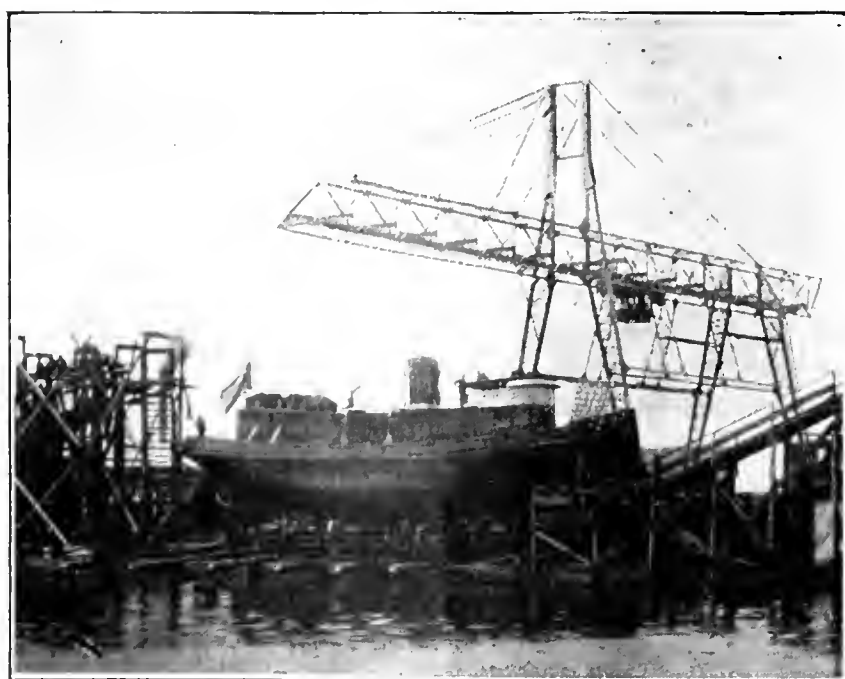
CANTILEVER BUILT FROM AN OLD COAL-UNLOADING BRIDGE
